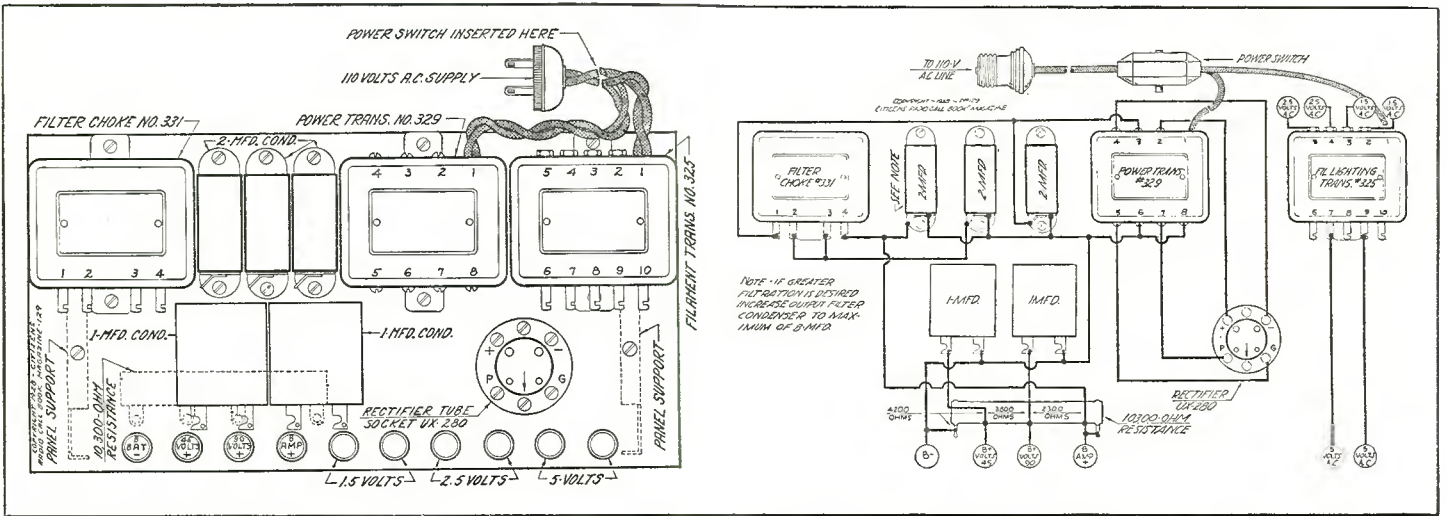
Parts for the power amplifier used with this receiver should be laid out in accordance with the panel layout shown above
